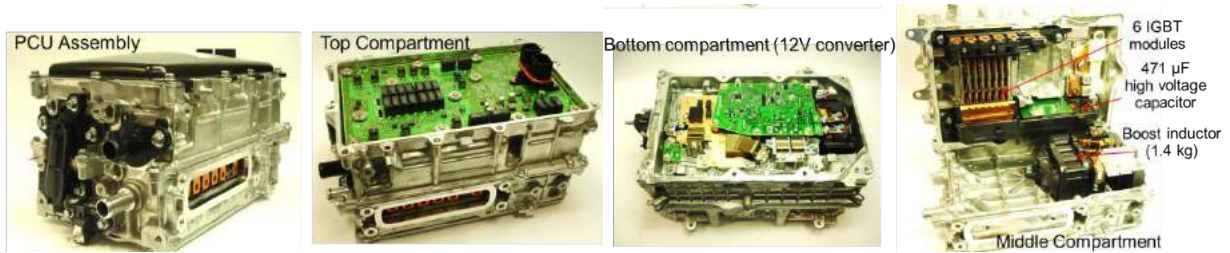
2017 Prius PCU assembly and compartments.
